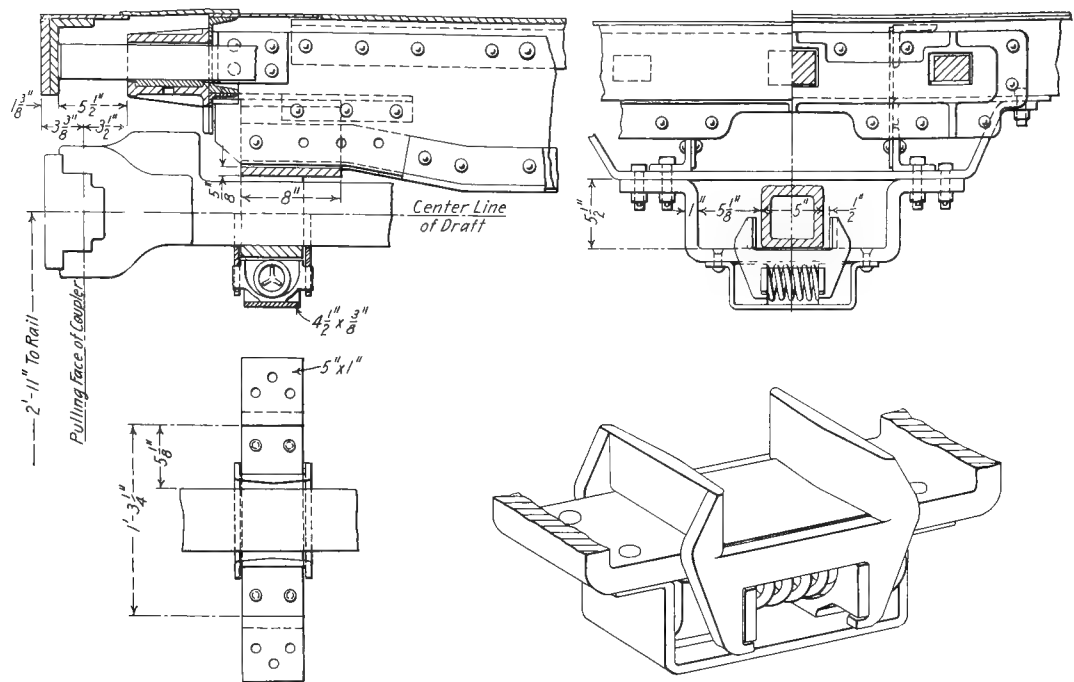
Miner Coupler Centering Device as Applied to Passenger Equipment.
